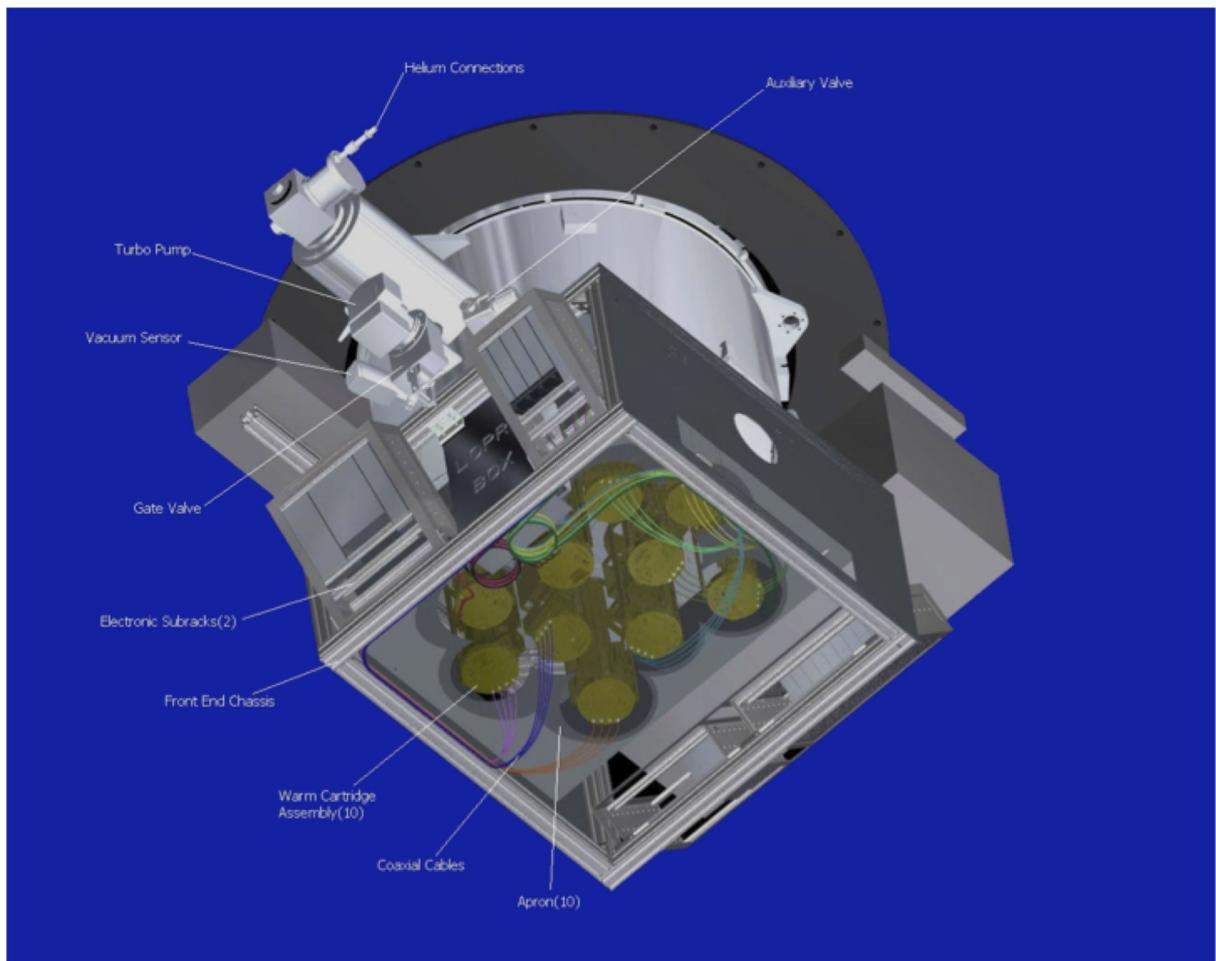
Bottom view of ALMA front end, showing WCAs.
